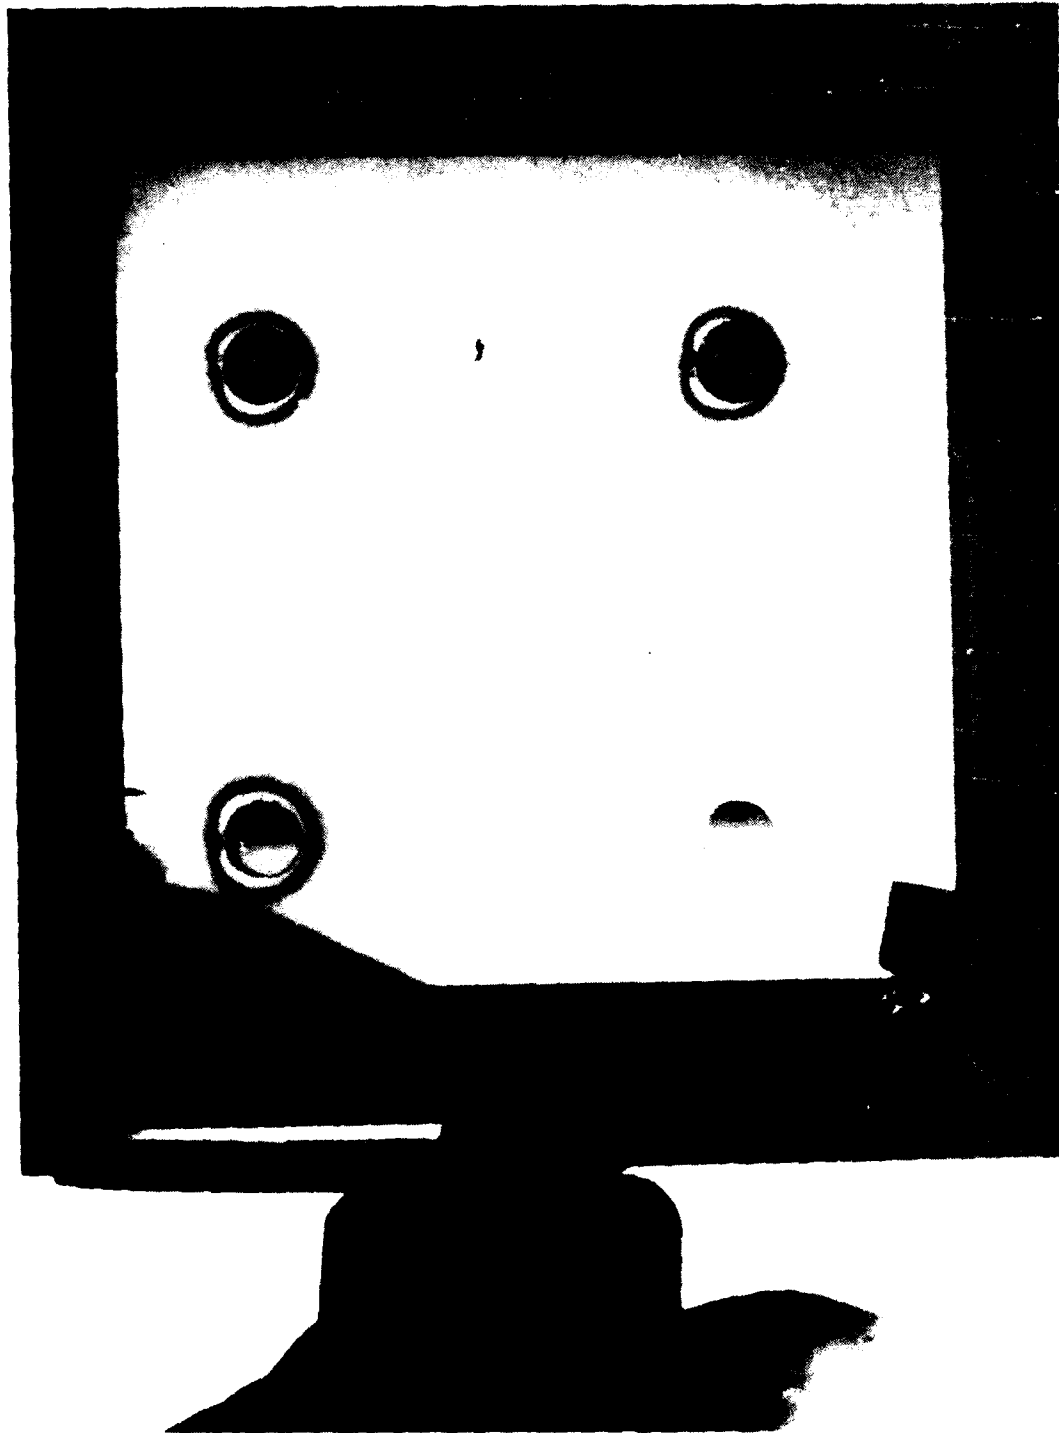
Cold-Worked Holes in a Metal Plate - A Fringe is Visible at Each of the Cold-Worked Holes
